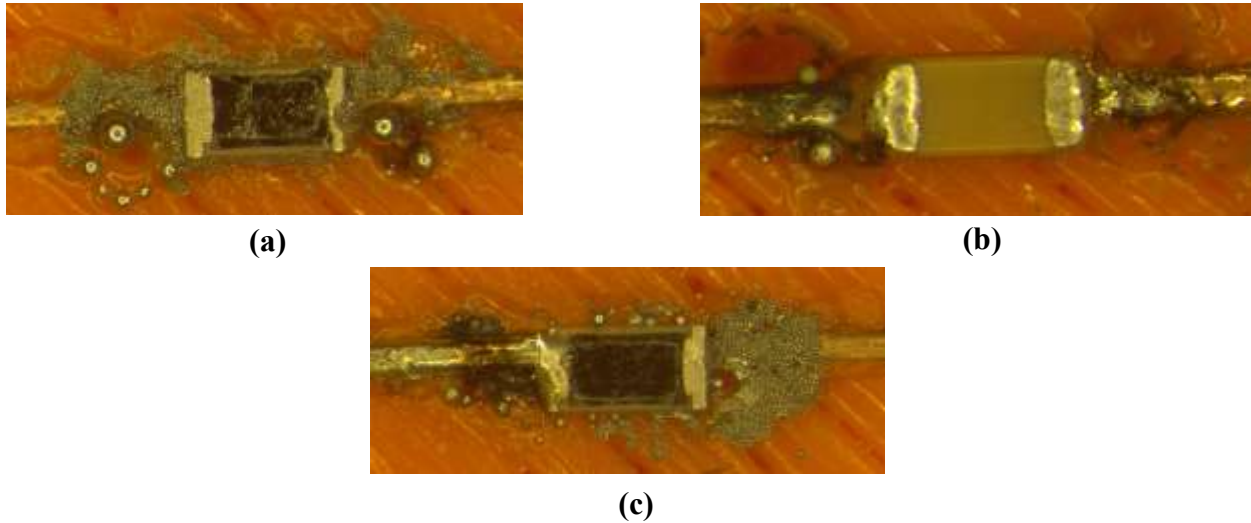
(a) Flux/solder paste placement at desired joint locations, (b) pre-applied flux and solder paste along cavity edges.
